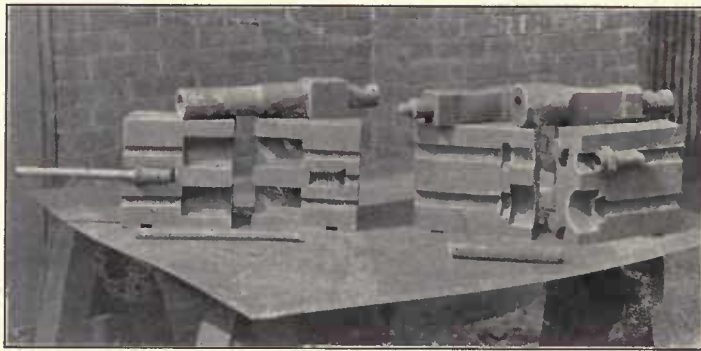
Insulator Pin and Cylinder Cock Top Piece Dies.
